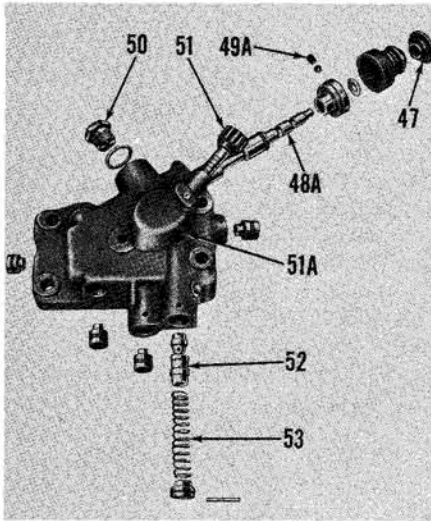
Exploded view of flow control valve. Refer to Fig. FO564 for legend. Restrictor valve (51B) is not shown in above view.
